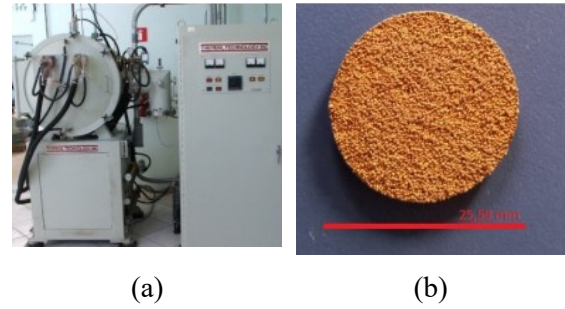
(a) Oven. (b) Industrial sintered filter.
